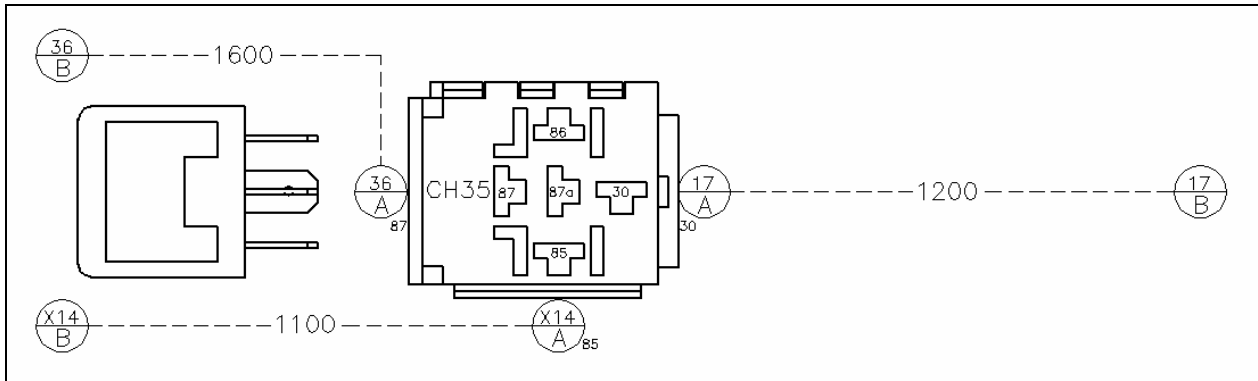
INTERLOCK VALVE RELAY CABLE ASSEMBLY
